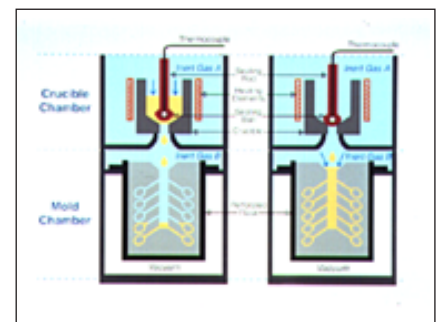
Sketch of a static vacuum assist casting machine with separate crucible and mould chambers and pressure over vacuum system
